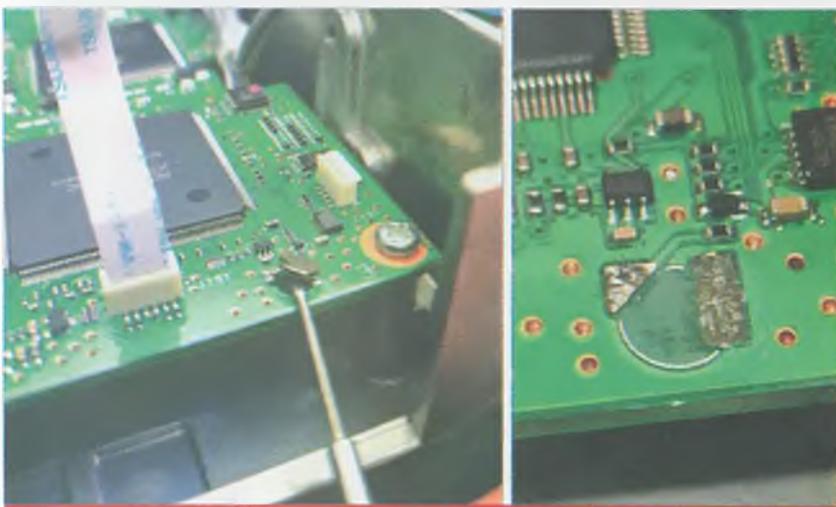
Illustrating careful removal of the battery (left) to ensure that the positive pad on the circuit board remains intact (right).
